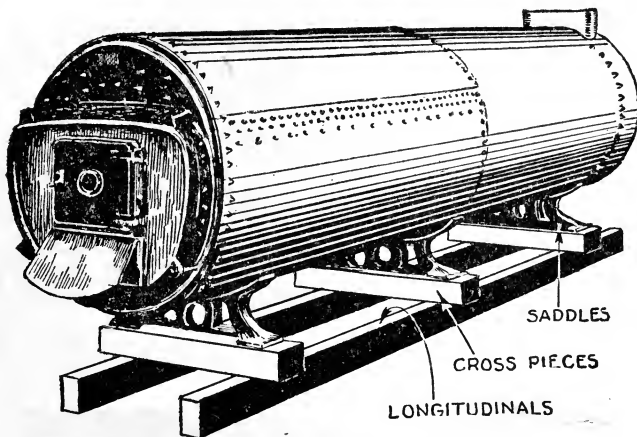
,458.—Setting for gunboat boiler as installed on Western river steamboats. The boiler rests on saddles which in turn are supported by cross pieces placed on top of longitudinal beams, the latter being stiffened by guy rods. *In erection* these guy rods should be carefully adjusted by means of the turnbuckle so that the load will be equally divided.
